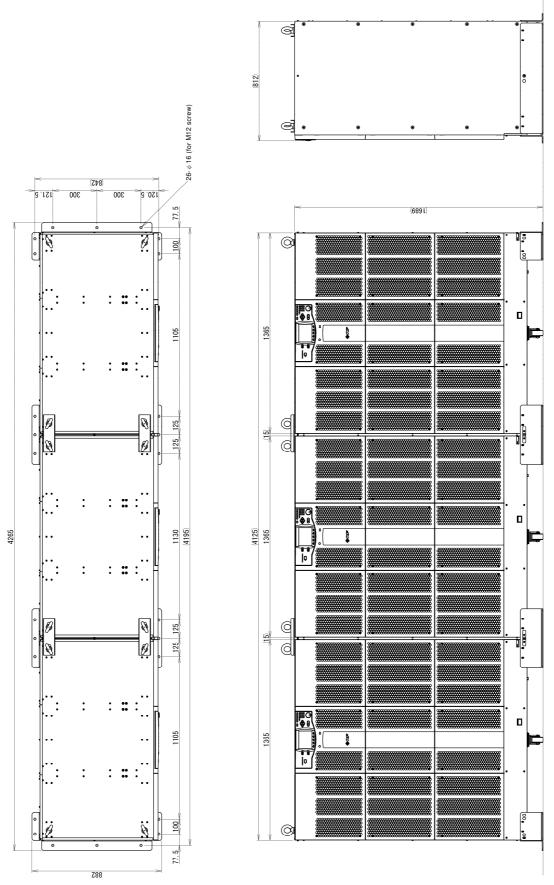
DP420LS/DP480LS Outline Dimensional Drawing when using Jointing Plate for 3 Units (Type 6L cabinet)
